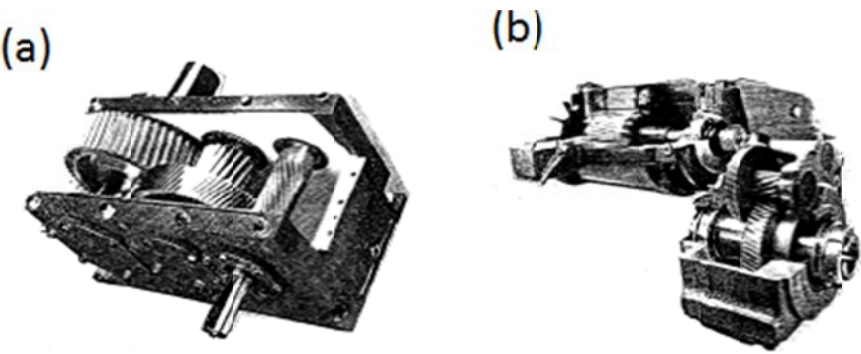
(a) Double reduction Gearbox (b) Gearbox with motor
